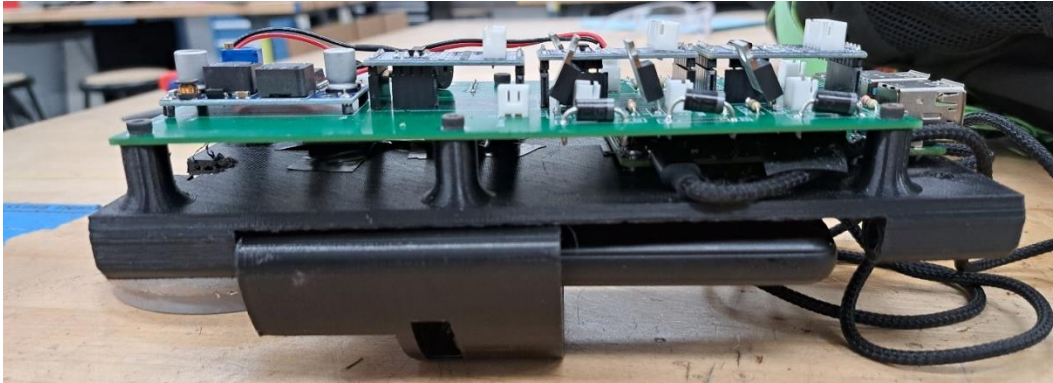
Side view of the Payload Electronics Housing Assembly after the Payload Demonstration Flight
